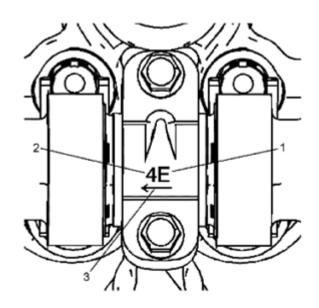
Identifying Flat Sections Of Camshafts Courtesy of SUZUKI OF AMERICA CORP.
